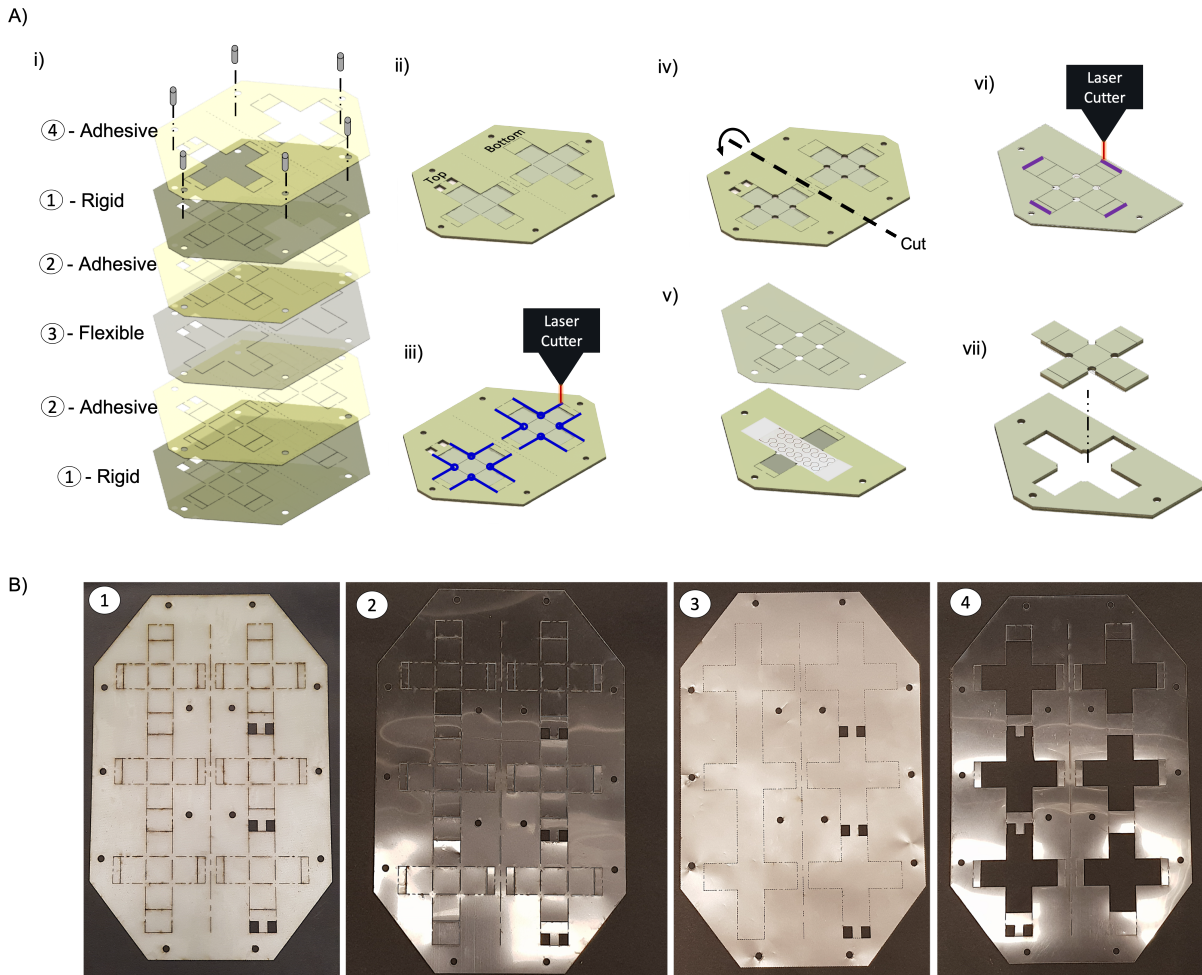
Assembly of the Sarrus based composites. A) Assembly steps of the Sarrus module. i) Exploded view of the laser cut layers and its bottom-up assembly steps. ii) Composite after aligning and assembling the layers resulting in a symmetric top and bottom layers of the Sarrus composite. iii) Release layer step for future module detachment. iv) Cut of half of the composite to generate both halves of the module layers, top and bottom. v) Alignment and assembly LCE and the bottom half of the Sarrus onto its top half. vi) Final release step of the composite. vii) Detachment of the Sarrus module composite. B) Photos of the four different design layers used for the Sarrus module composite of the crawler, which follows the same assembly steps as a single Sarrus module. 1) Rigid layer with the top and bottom halves design patterns for the crawler assembly. 2) Adhesive layer that connects the rigid layers with the flexible layers. 3) Flexible layer. 4) Final adhesive layer to sandwich the LCE actuator layer onto the top and bottom half of the Sarrus-based crawler.
